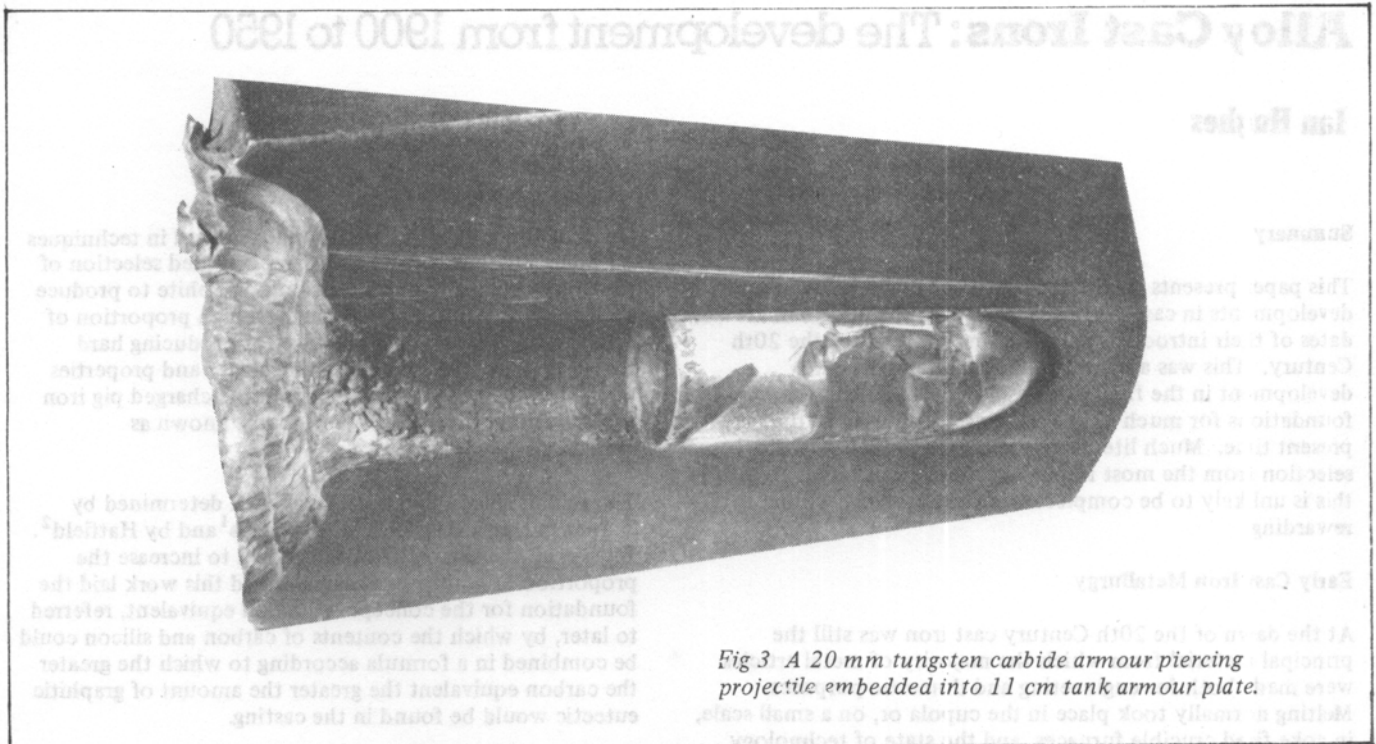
A 20 mm tungsten carbide armour piercing projectile embedded into 11 cm tank armour plate.
